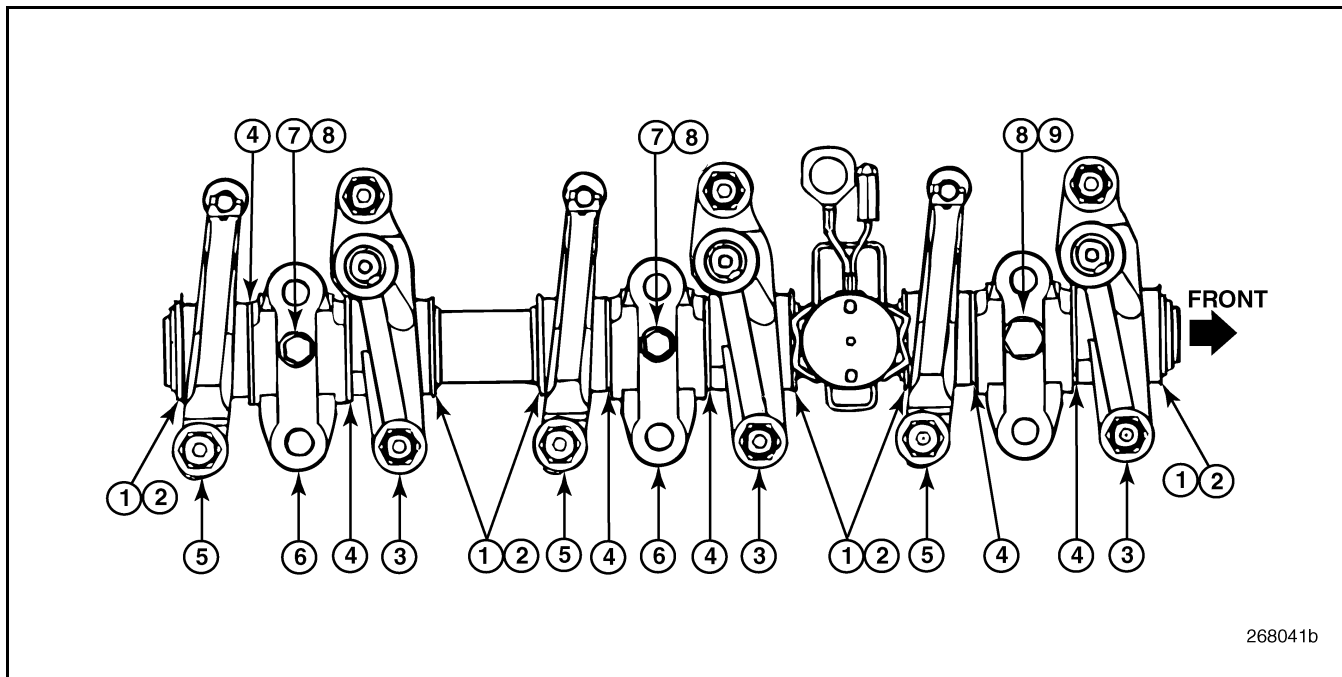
Mack PowerLeash™ Rocker Shaft Assembly
